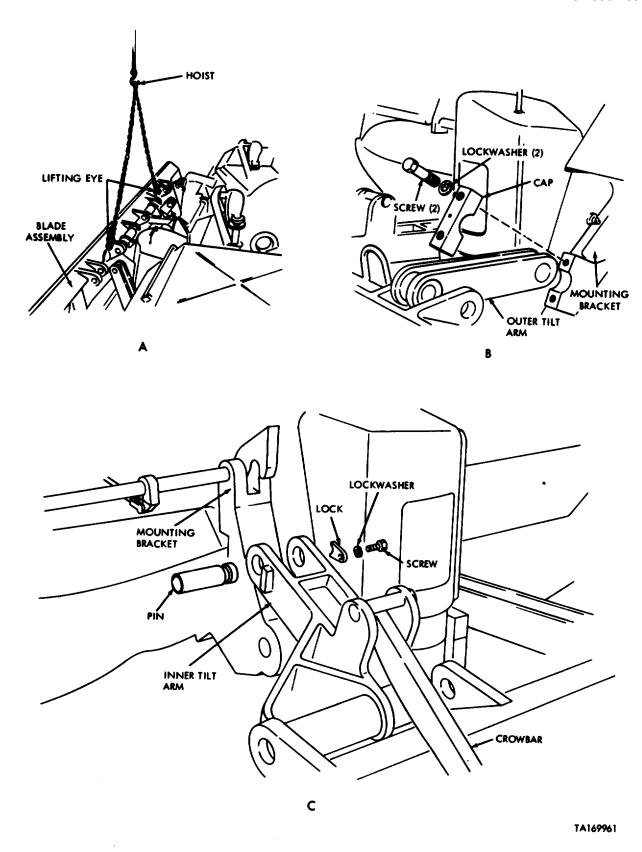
Removal or installation of blade assembly (sheet 1 of 2).
